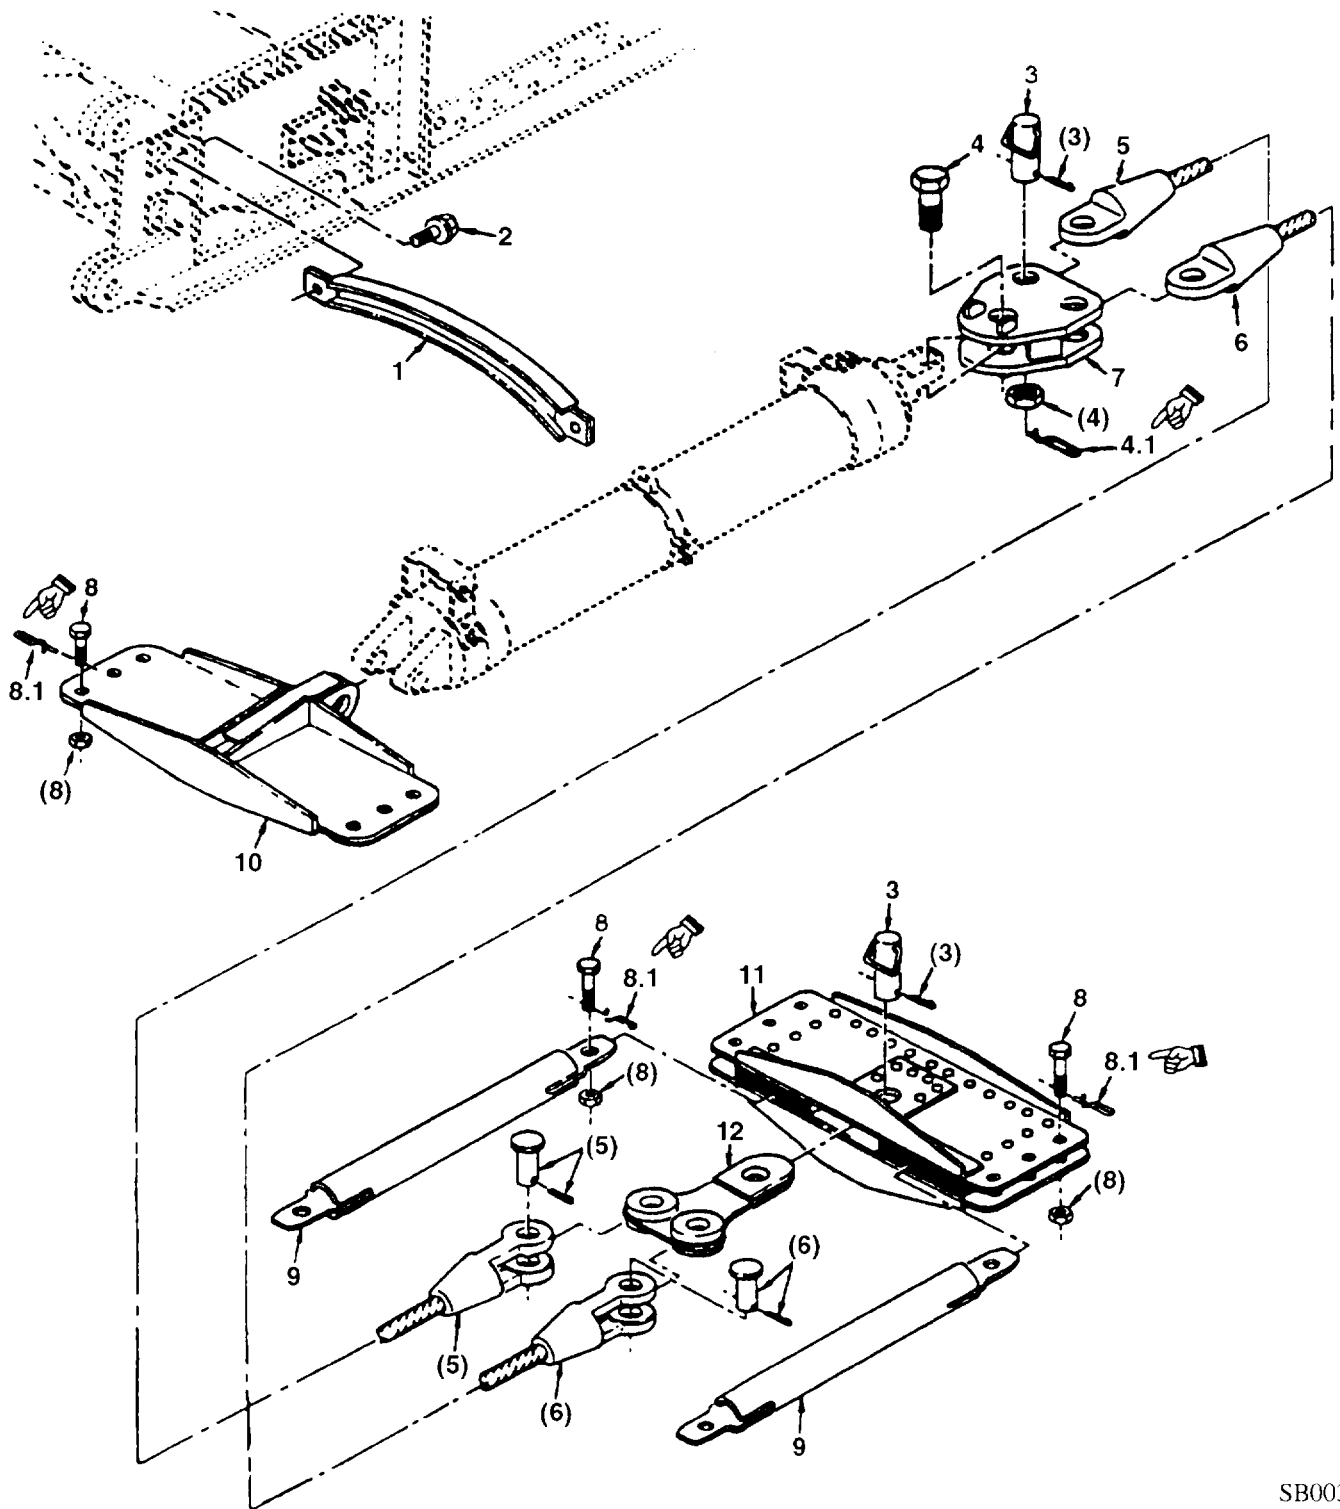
BEAMS, CABLES, AND RELATED PARTS
